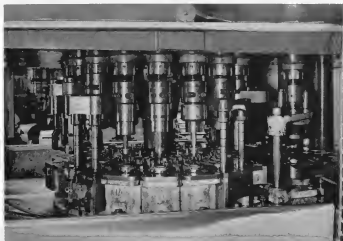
Rotary transfer press tool assembly. (Guard not shown.)
